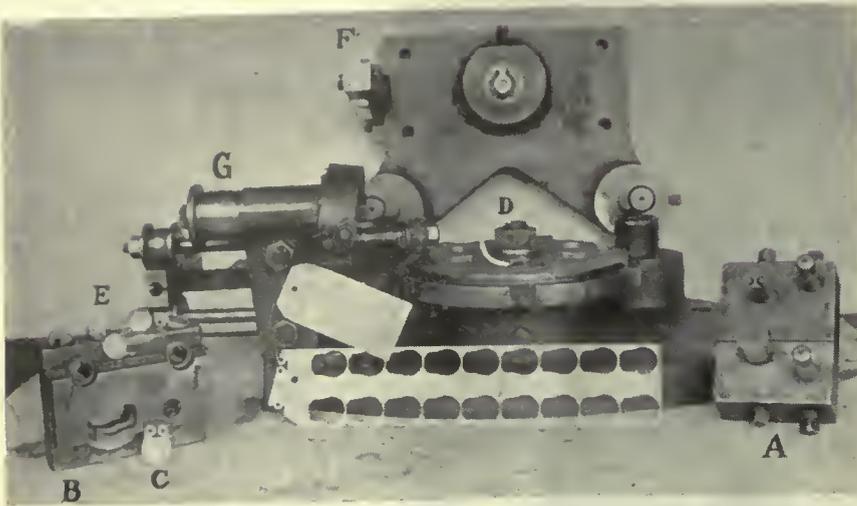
A GOOD GENERAL VIEW OF A REVOLVING OIL COVER DIE.
